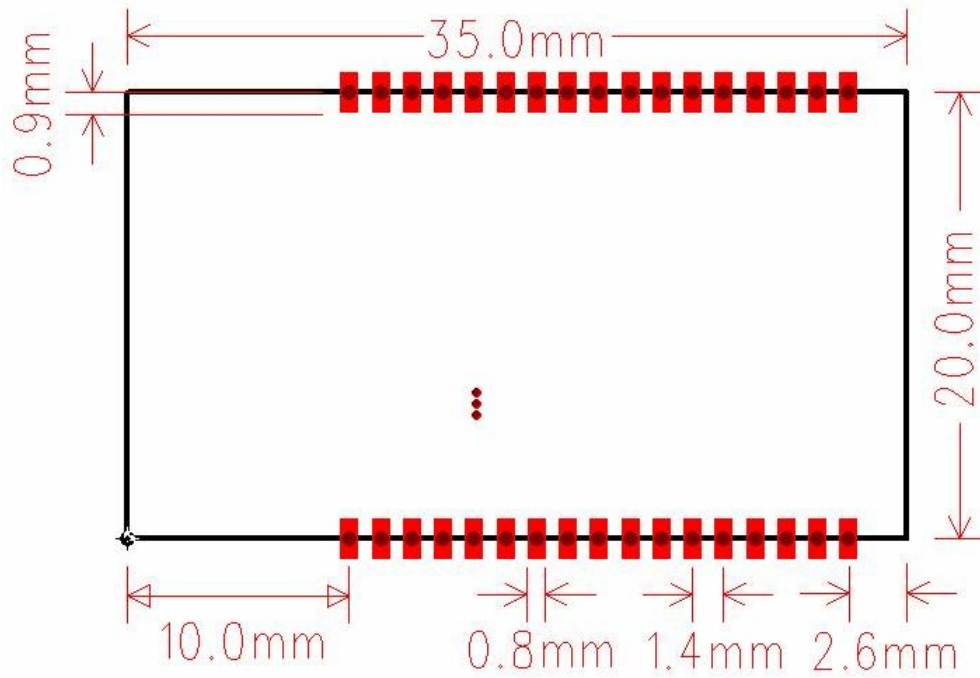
PCB mechanical drawing of QRF-0600 Module (Back view)
